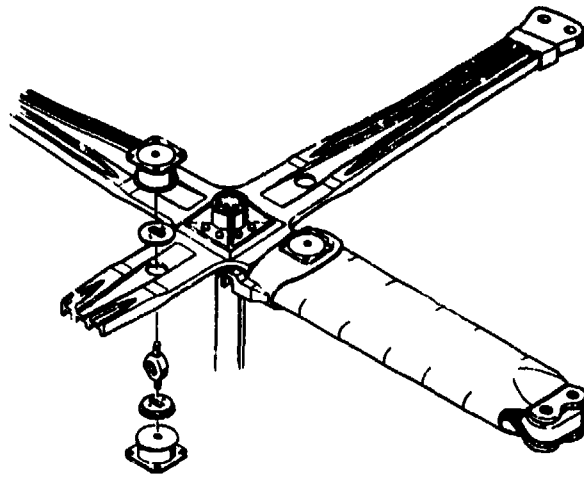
BEARINGLESS ROTOR HEAD OF BELL 380
